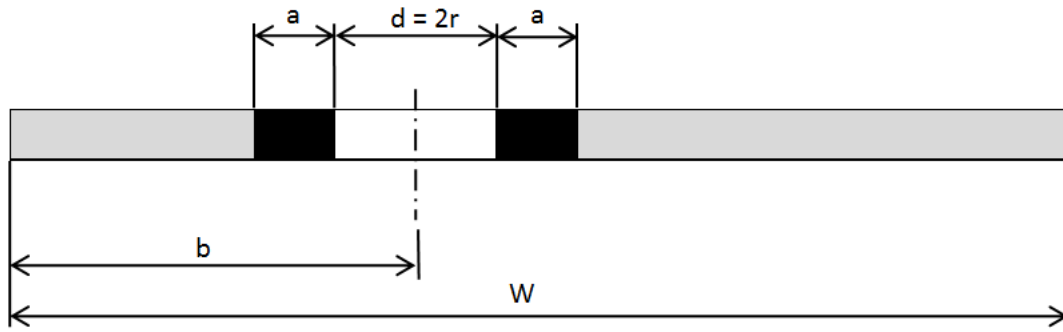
Geometry of specimen with two cracks at a hole of equal length
